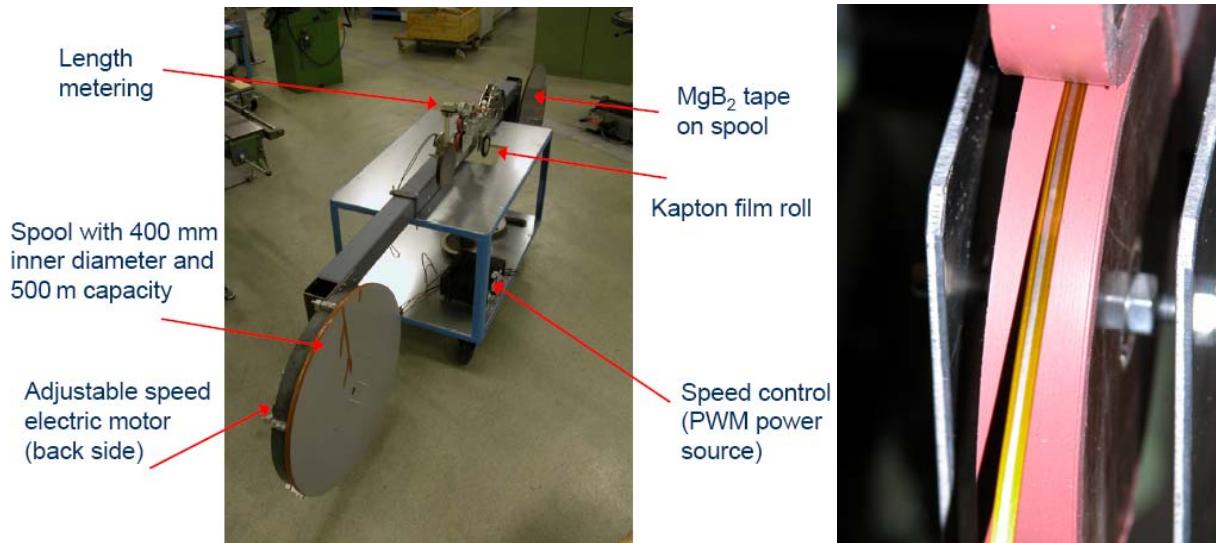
Insulation machine (left) and the insulated MgB₂ superconductor coming out from the machine (right).
